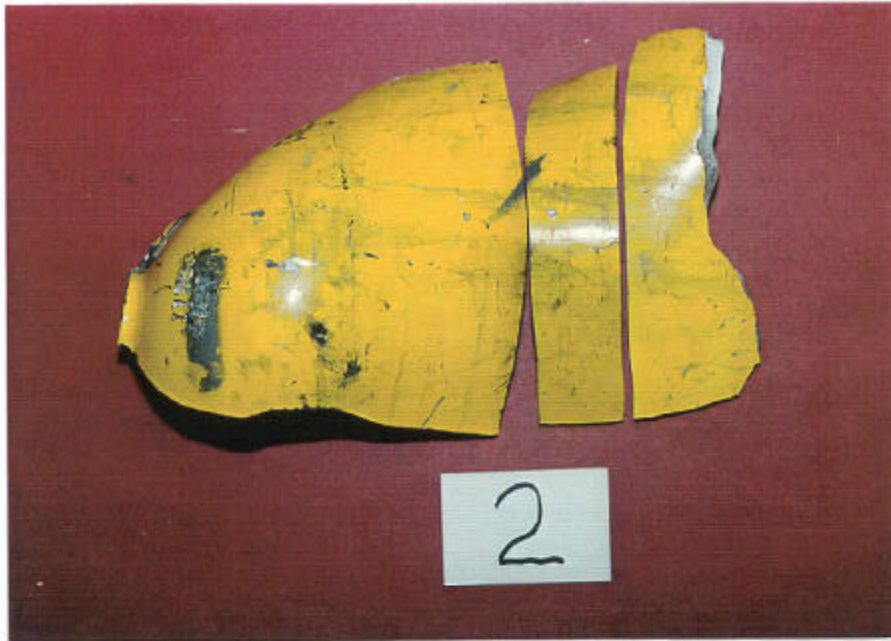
Fracture piece (2), with transverse section previously tested as a bend test coupon that failed during testing, shown in Figure 1.
